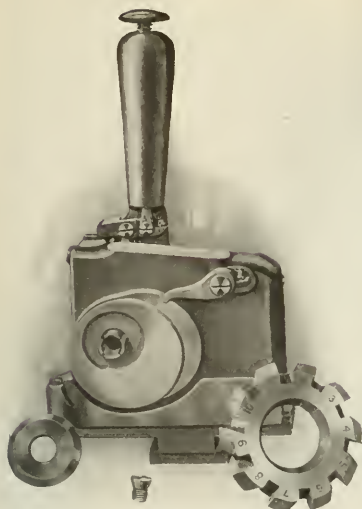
Parts of Rivett-Dock Thread Cutting Tool
